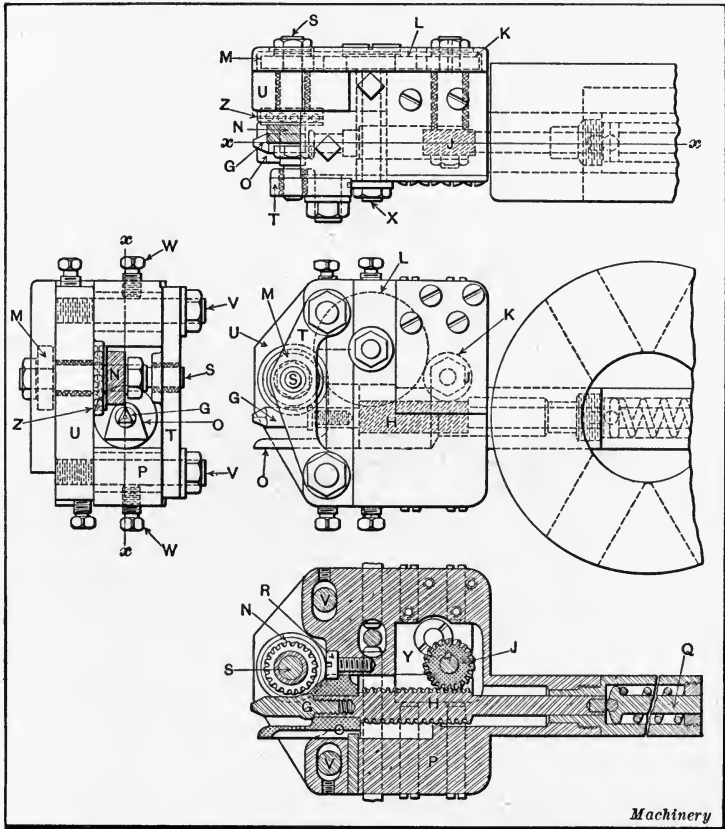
Tool for Generating Teeth of Helical Gears in Automatic Screw Machine
